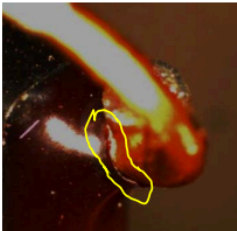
Solder bead on TCO lead from Sub 64 after second Lock-Rotor Test
